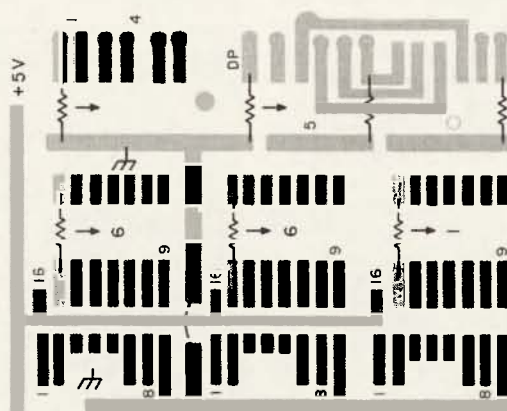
Component layout (foil side view). Strap ground wire with 24 gauge.
